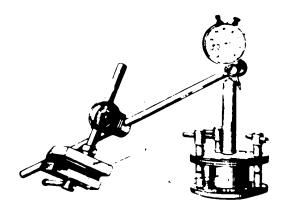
A Device for Measuring Radial Turbine Rotor Clearance in the Roller Bearing
